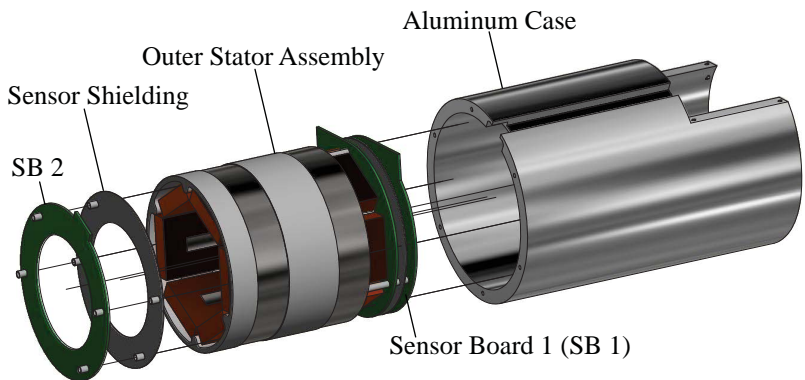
Outer rotary stator insertion into the outer aluminum case that mechanically supports the assembly and positions the outer stator with respect to the inner stator.
